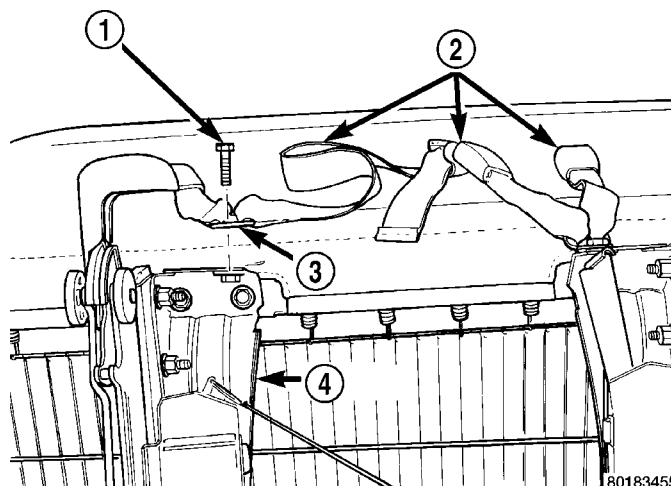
SEAT BELT BUCKLE - SECOND ROW - THREE PASSENGER BENCH
